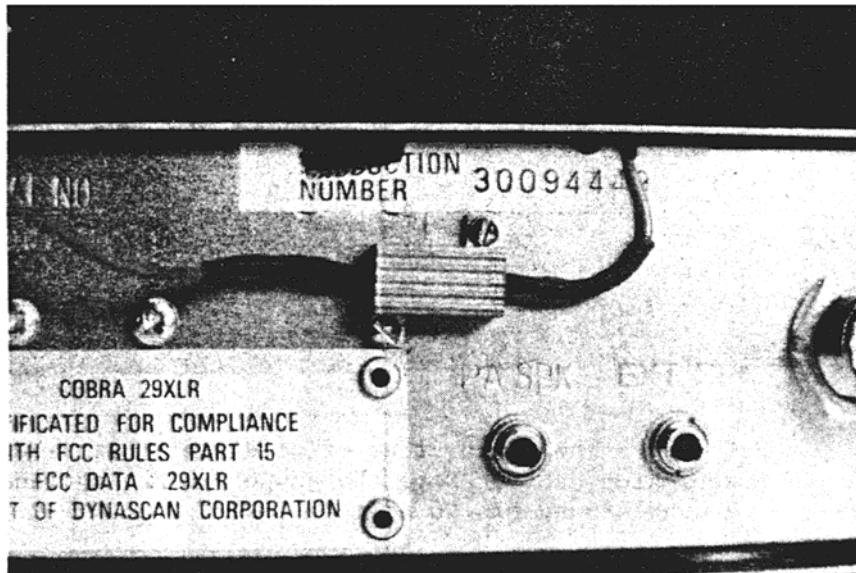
Mount the 22 ohm resistor on chassis for heat sink.
